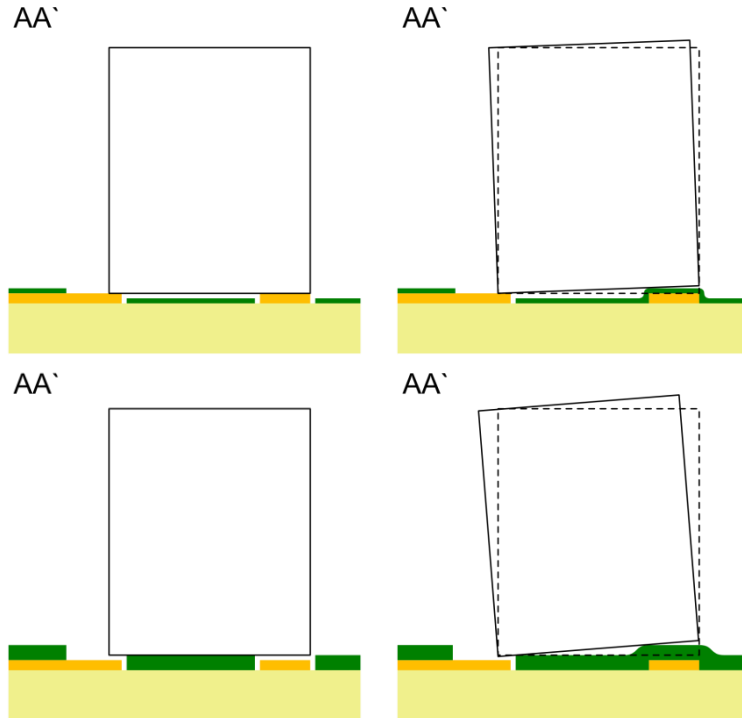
Correct(left) and wrong(right) layout of copper and solder mask for solder masks both thinner(top) and thicker(bottom) than the copper layer when no additional copper is routed through the footprint.
